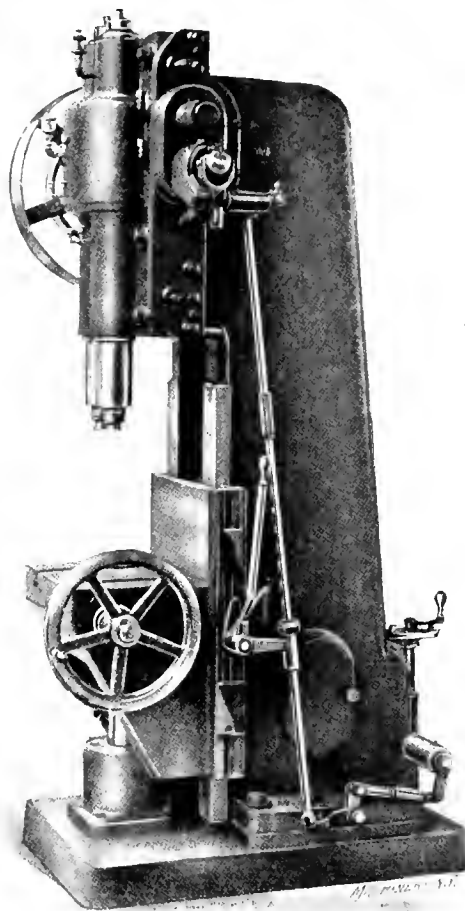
Side View of Machine, showing Automatic Control for Spindle, Feed and Quick Return
